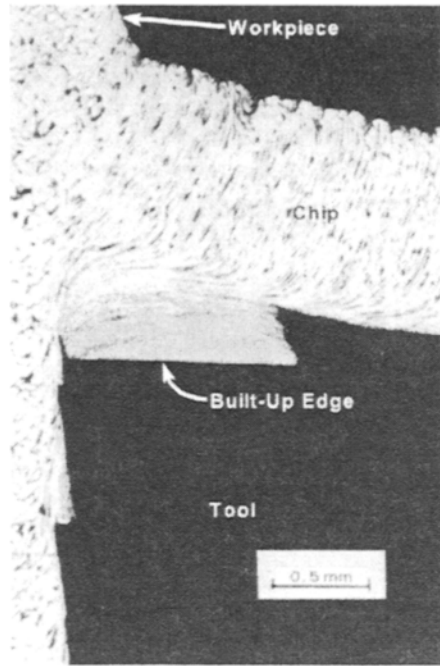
Built-up edge on tool machining Al–Cu at 38 m/min. (Reproduced from E.M. Trent, *Metal Cutting* (1997), with the permission of Butterworth-Heinemann, Oxford.)
